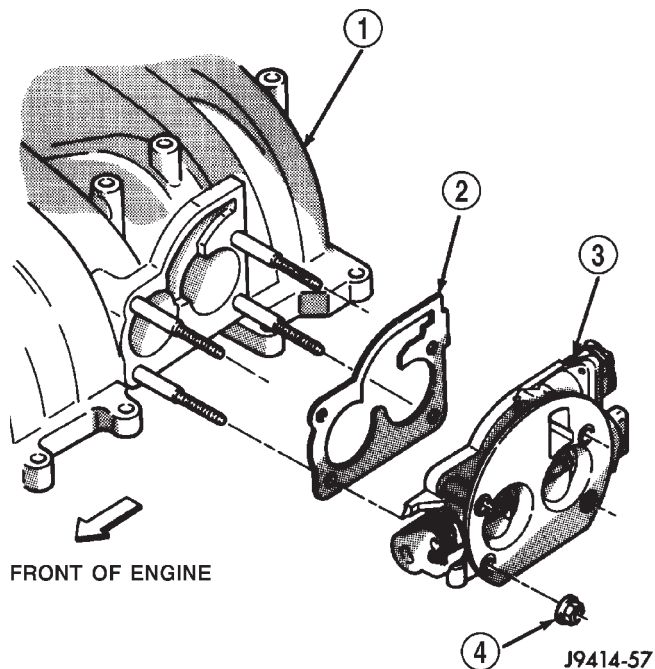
Throttle Body Mounting Nuts—8.0L Engine
